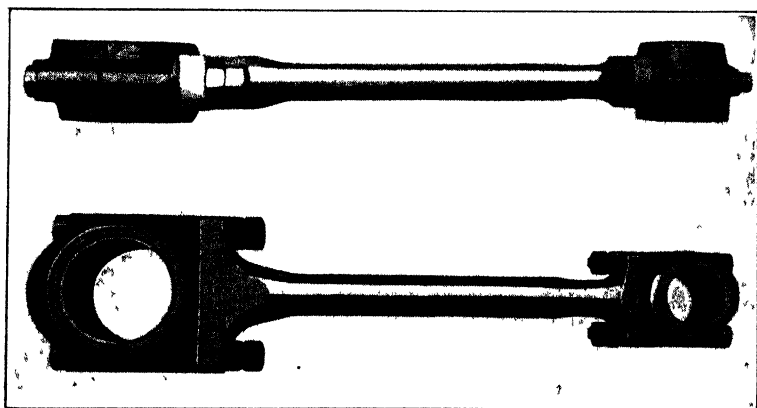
Connecting Rod of McIntosh and Seymour Trunk Piston Type Engine
